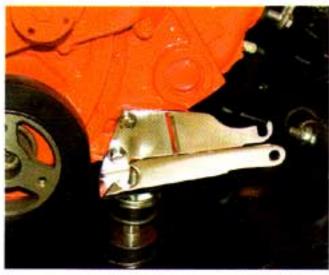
The new chrome steering pump bracket P/N 53-27C bolts to the front of the engine using the same two bolt holes the stock mount used. The new bracket comes with all chrome mounting hardware.
